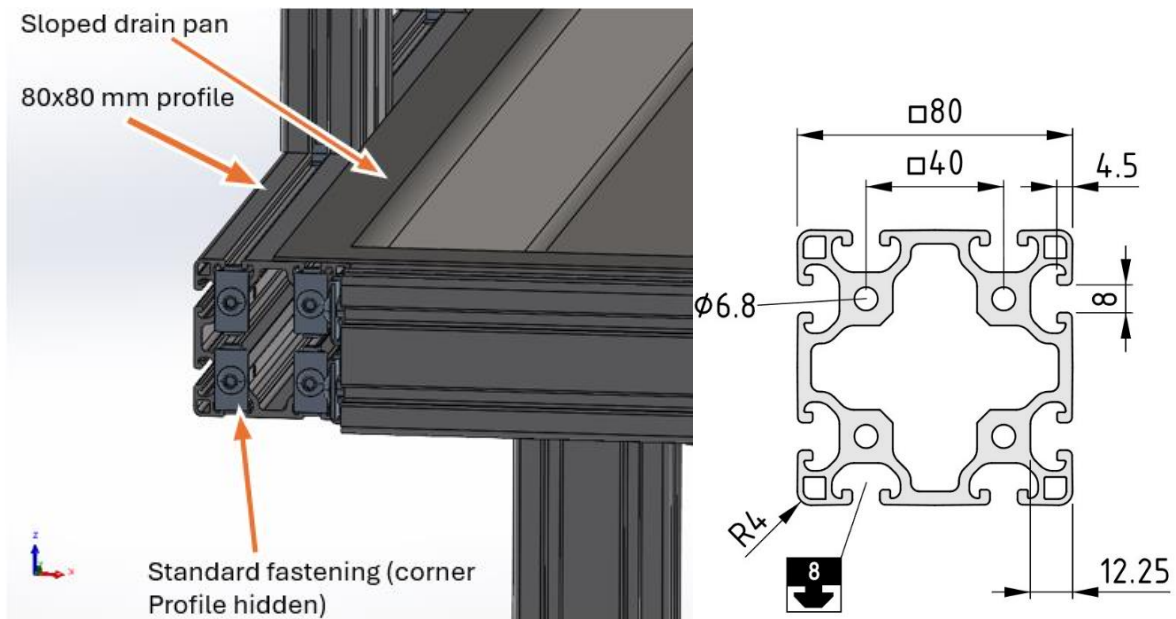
Connection detail of the sloped drain pan mounted on 80x80 mm profiles, shown with reference XYZ axes and opened (corner) profile cut for clarity.
